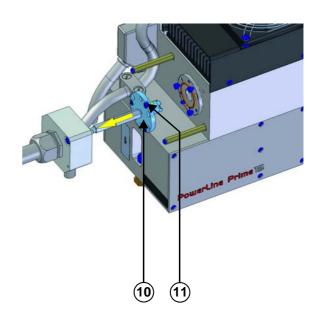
Replacing the laser head - Disconnecting the glass fibers on the laser head
